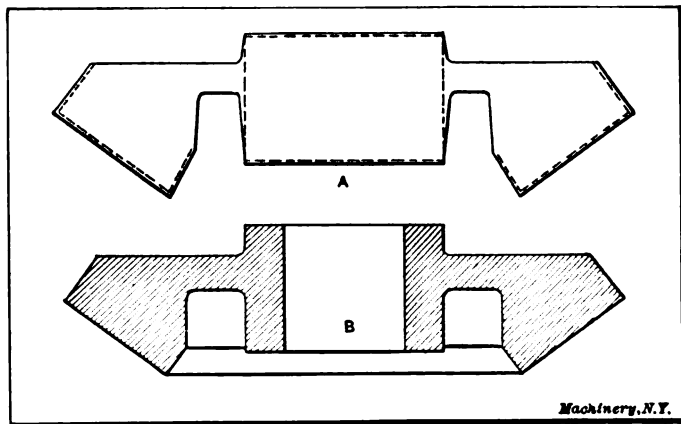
Templet with Shrinkage, Draft and Finish Allowances added, used in turning out the Impression in a Die for a Bevel Gear Blank. B shows the Finished Gear Forging after being machined
